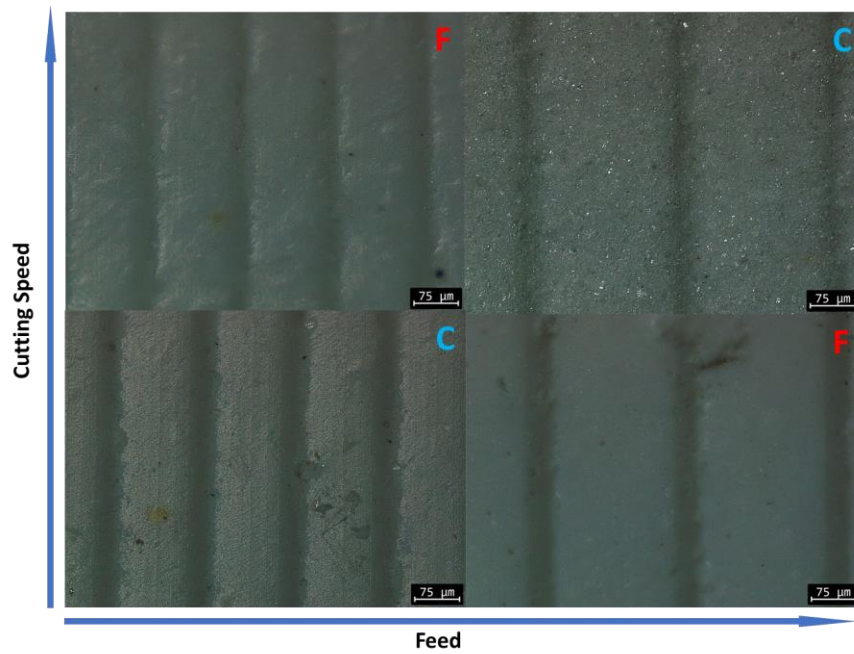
Interferometer images of samples machined with +5 degree rake angle tool and HMC binder.
